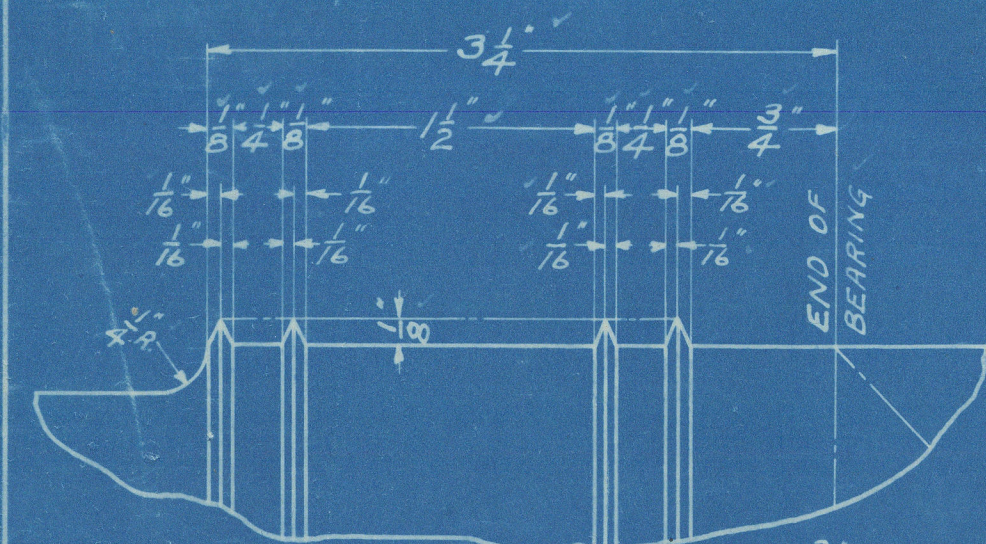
DETAIL OF TOOTH BEVEL ON EACH SIDE OF GEAR & PINION
